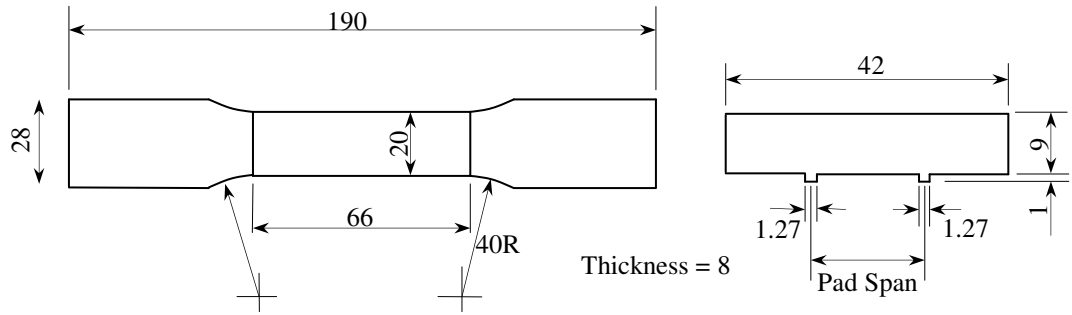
Specimen and fretting pads (all dimensions in mm) [24].
